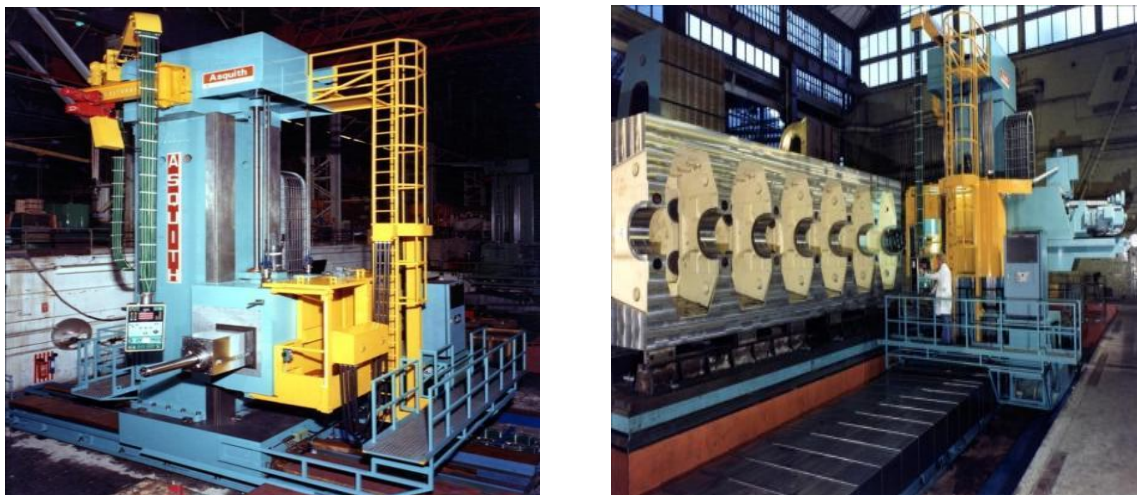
Moving column horiz. ram type machine and marine diesel engine crankcase
